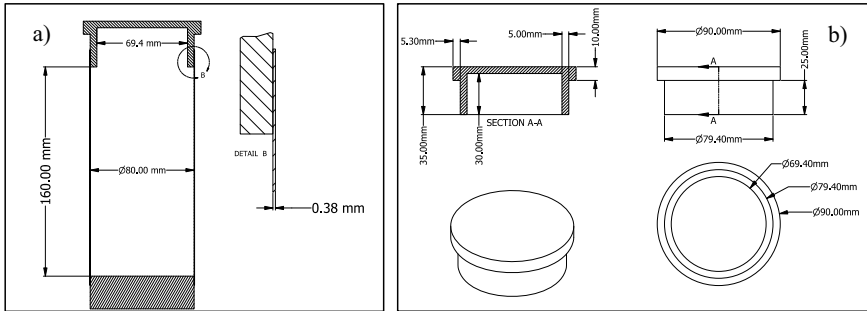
System dimensions and detail of the mechanical constraints. a Shell; b top disk
